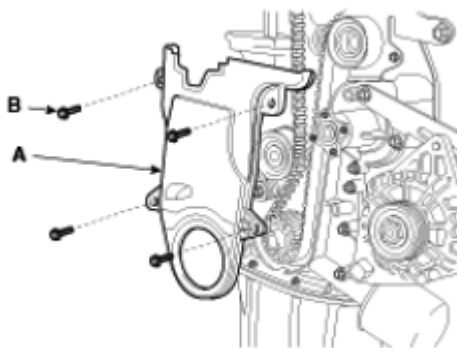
Identifying Bolts And Timing Belt Lower Cover
